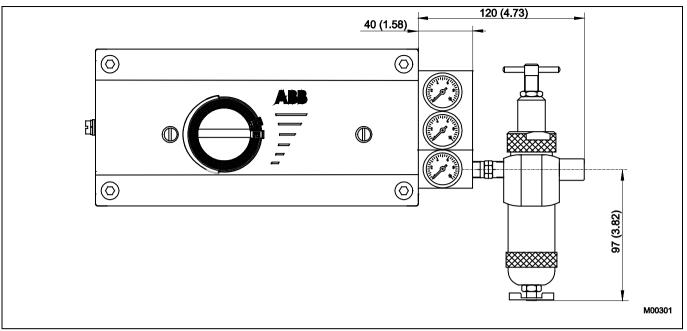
Positioner TZIDC-200 with pressure gauge block and filter regulator
